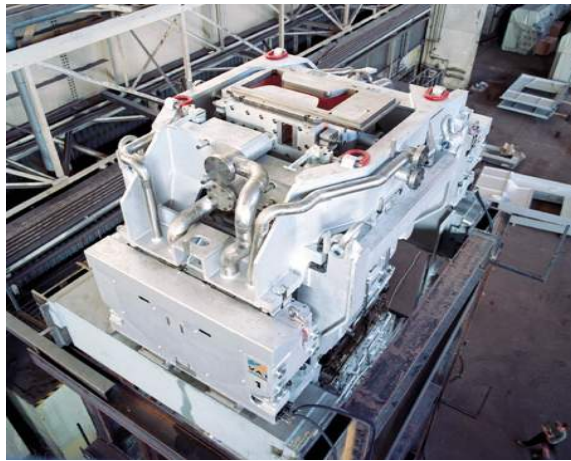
Machine head in combination with a beam blank mold from Siemens VAI.
